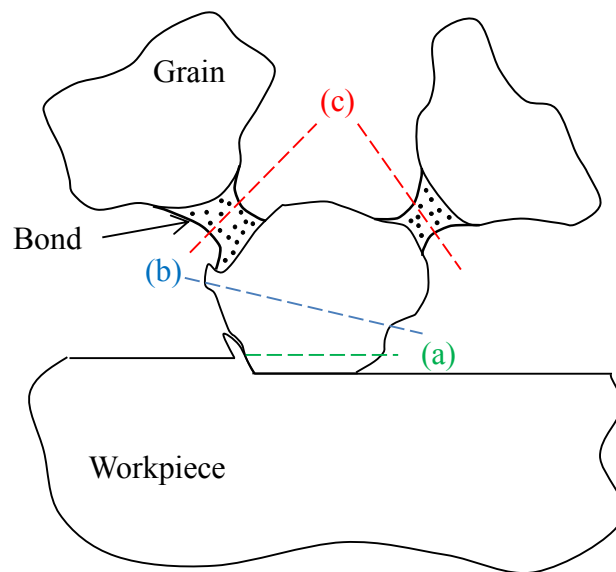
Illustration of wear mechanisms including; (a) attritious wear, (b) grain fracture and (c) bond fracture [4, 6, 8, 9]
